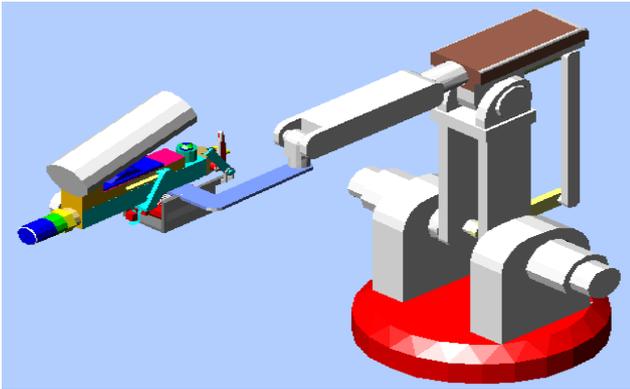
Robot arm with the automated combustion powder thermal spray gun attached.
